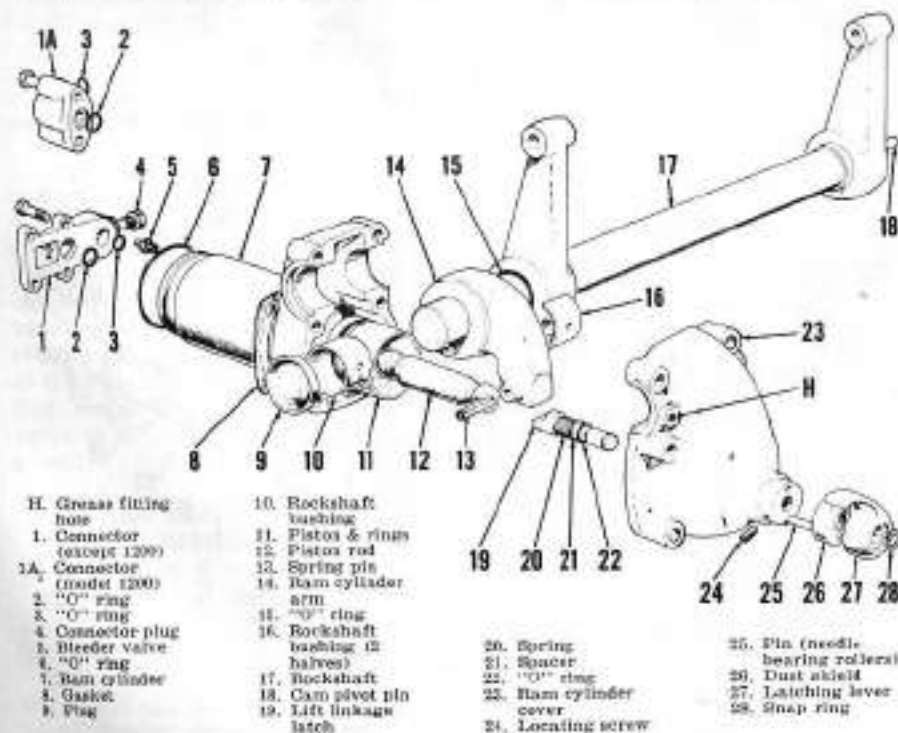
Exploded view of typical rockshaft cylinder and rockshaft assembly. Connector (1A) is used on model 1200, connector (1) on all other models. Refer to Fig. 208 for cross-sectional view of rockshaft latch assembly. No attempt should be made to remove or reposition the rockshaft lift arms. Rockshaft ram cylinder arm (14) is renewable by splitting old arm, then pressing arm from shaft. Heat new arm to expand to fit, press into position and allow to shrink fit to shaft.
